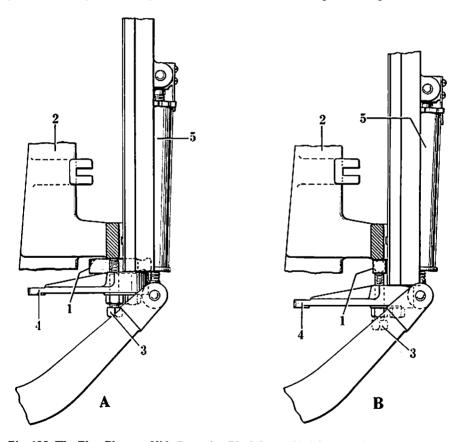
The First-Elevator Slide Recasting Block is provided for recasting lines assembled wholly or partly in italic or boldface position. The block I (drawing B) prevents the first-elevator slide from making its full upstroke to transfer position. This prevents the first-elevator jaw duplex rail from rising high enough to engage and to be retracted by its operating bar on the first-elevator slide guide. The matrices assembled in auxiliary position, therefore, will remain on the duplex rail as long as the recasting block is in position.
